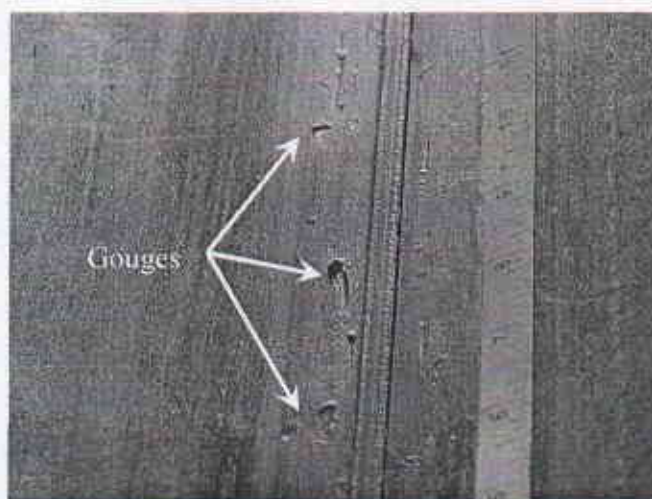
Photograph of Sample 1 imperfections in pipe adjacent to long seam weld. Scale shown is in inches.
